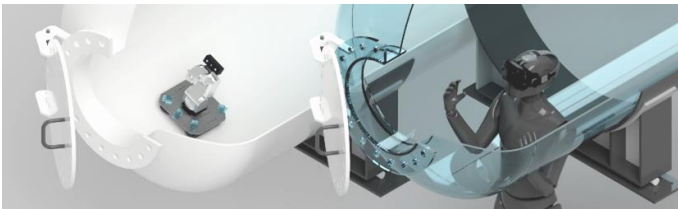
RENDERING OF INSPECTION PLATFORM WITHIN A PRESSURE VESSEL AND INSPECTOR WEARING A VR HEADSET AS IF THEY ARE INSPECTING ON LOCATION
